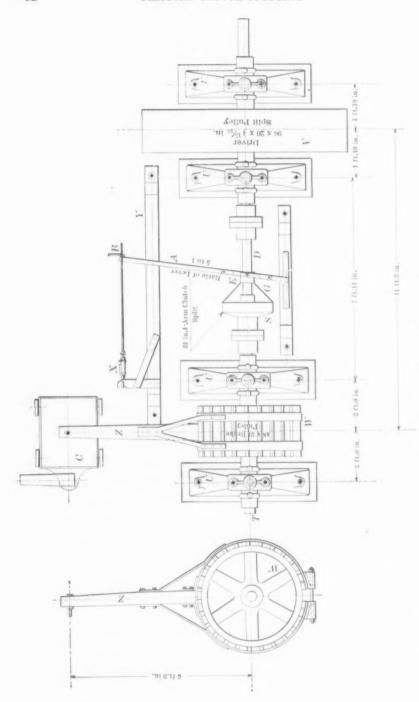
DYNAMIC CLUTCH-TESTING MACHINE,
